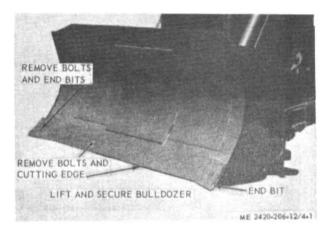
Bulldozer cutting edge and end bits, removal and installation.
